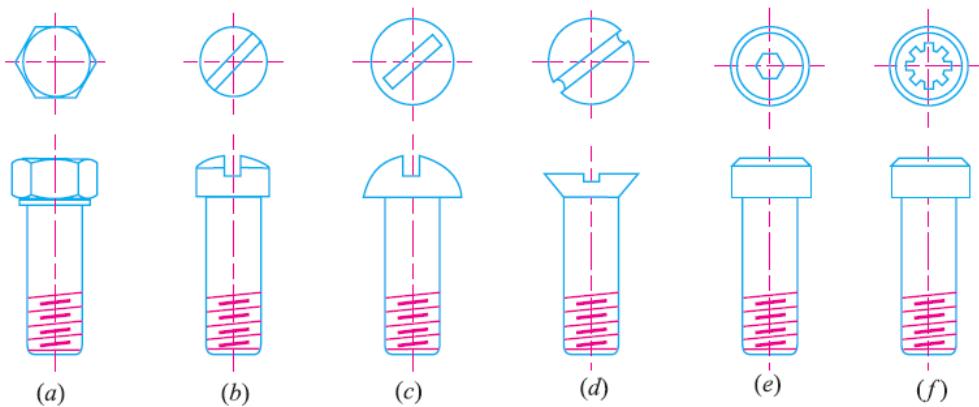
Types of cap screws: (a) Hexagonal head; (b) Fillister head; (c) Round head; (d) Flat head; (e) Hexagonal socket; (f) Fluted socket.
